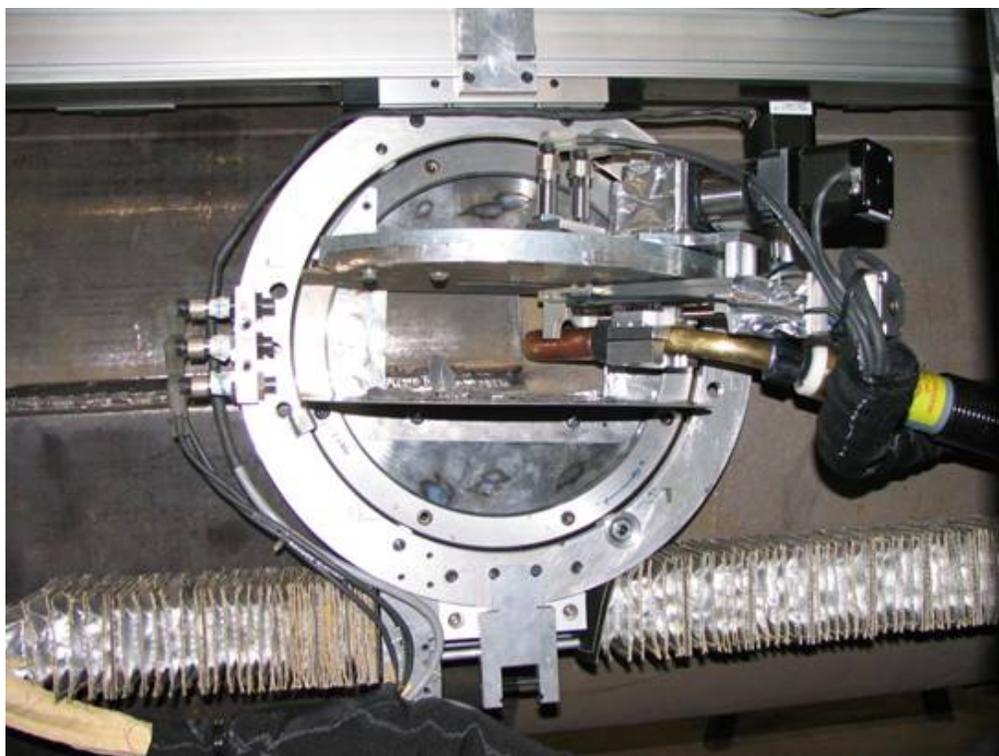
System in Position to Make Circumferential Weld from 9 to 12 o'clock
